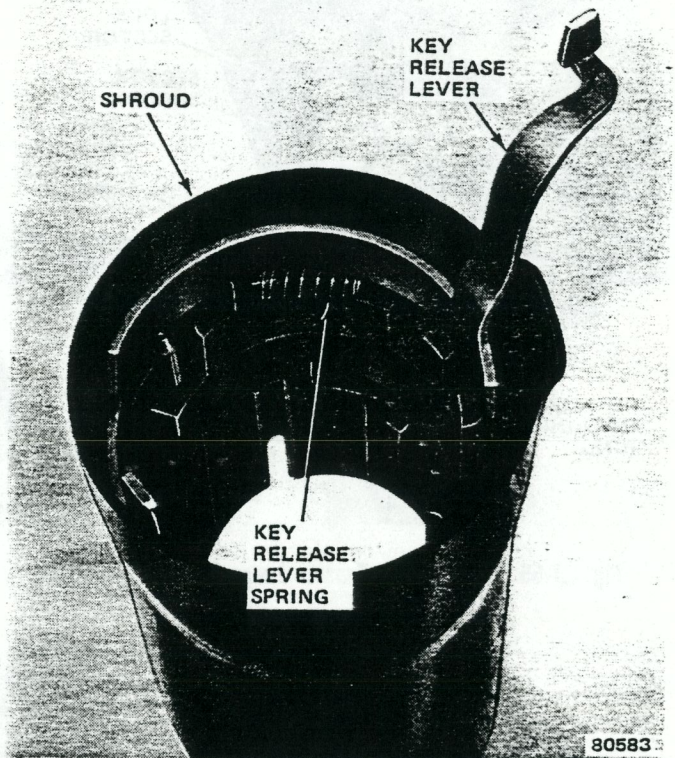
J-62 Key Release Lever and Spring Removal/Installation
